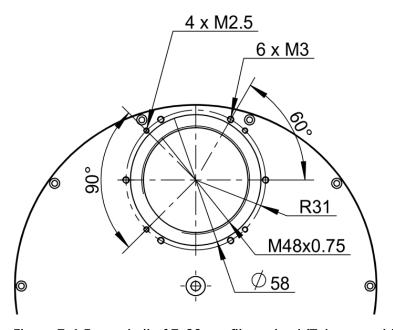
Front shell of 7x36mm filter wheel (Telescope side)
